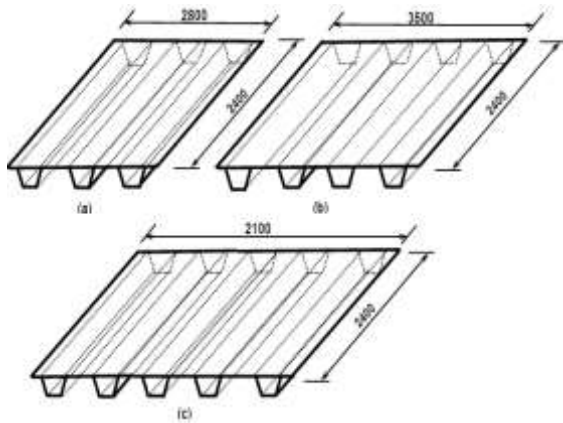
Geometry and dimensions of Hat Stiffened Plates having: (a) three stiffeners (b) four stiffeners and (c) five stiffeners.
